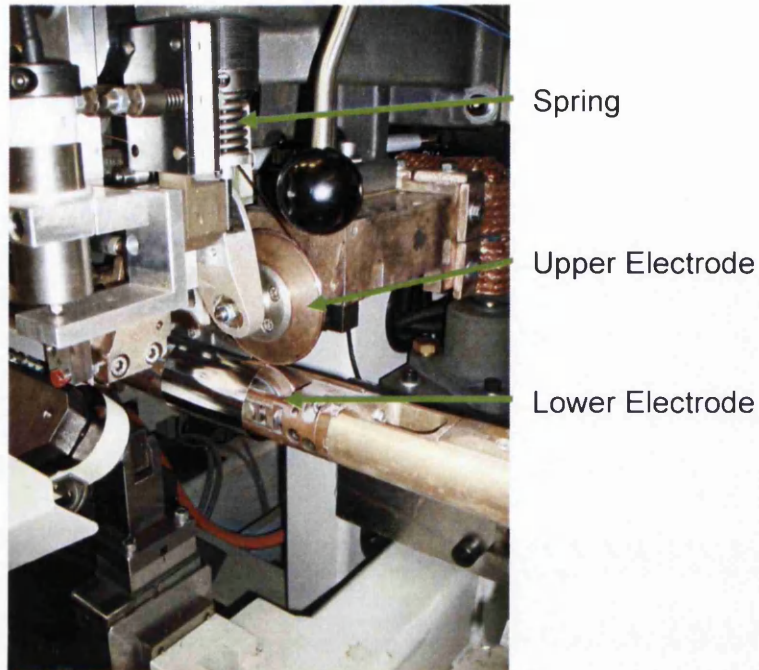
photograph of a Soudronic high speed seam welder modelled in this body of work showing the two electrodes, the upper one being spring loaded. A can body is placed between the two electrodes to demonstrate the movement of a can body. The can body would be fed through the electrodes causing it to move from left to right.
